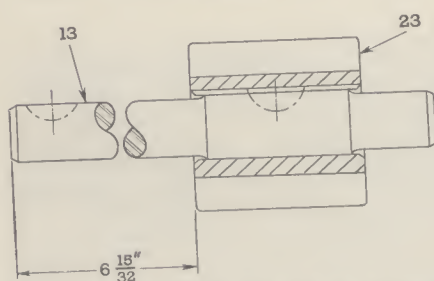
B—A GM engine showing location of oil pump gear (23) on drive shaft (13).
